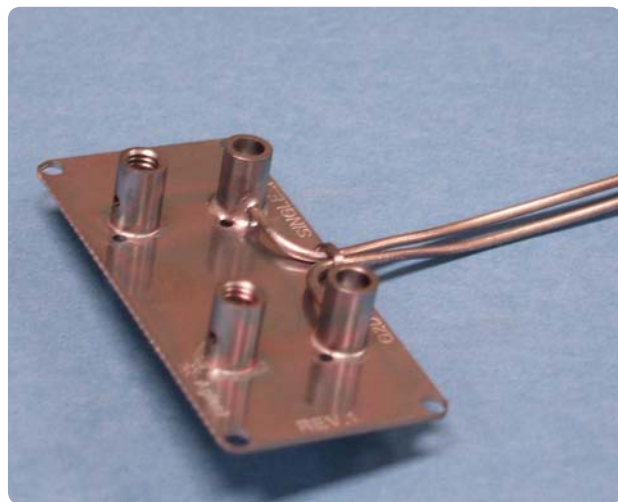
Agilent's modulator design includes specialized fittings attached by projection welding.
